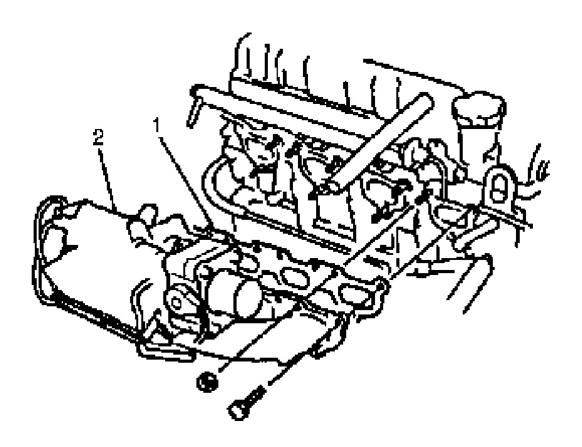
Removing Intake Manifold With Throttle Body From Cylinder Head Courtesy of SUZUKI OF AMERICA CORP.
